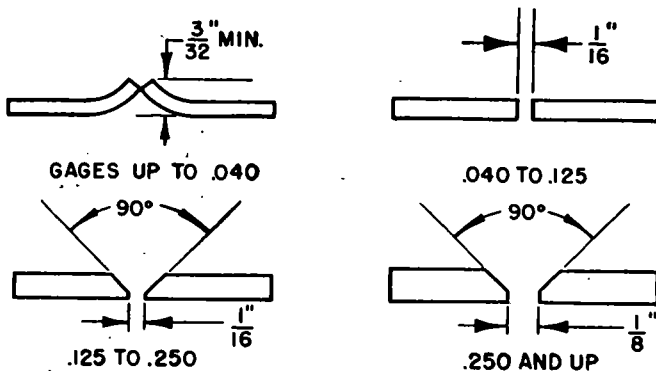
Preparation of edges for welding magnesium sheet.
